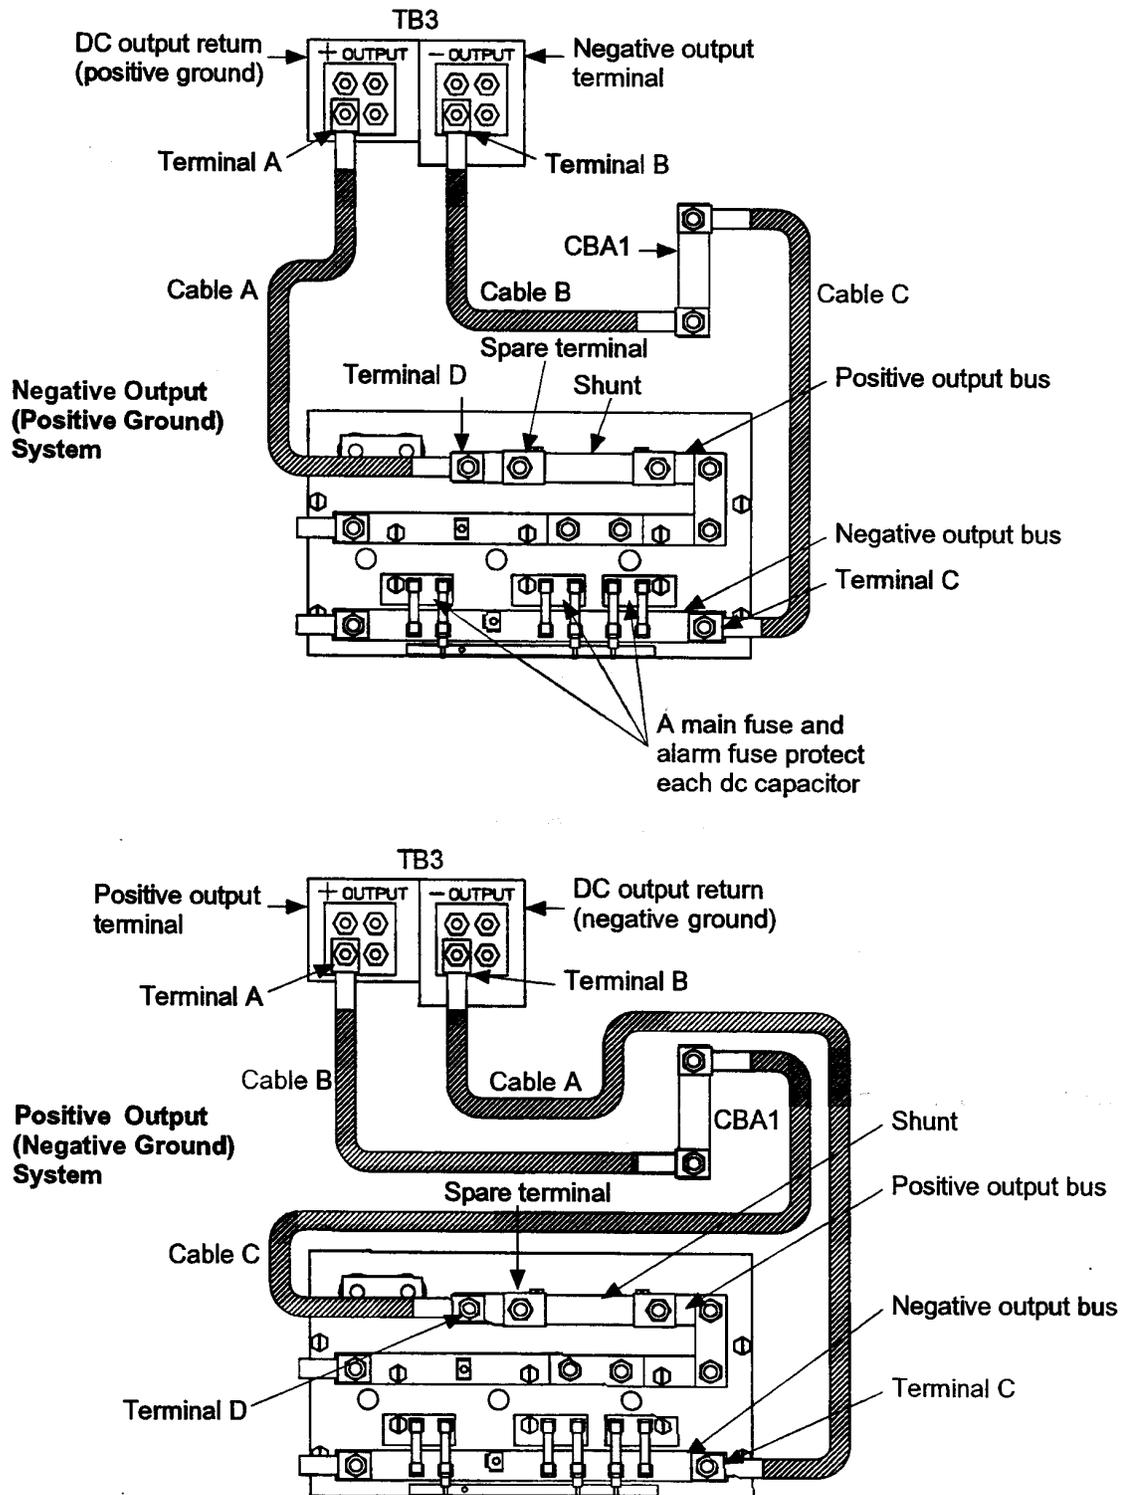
Output Polarity Conversion and Component Detail on Bus Bar Assembly
